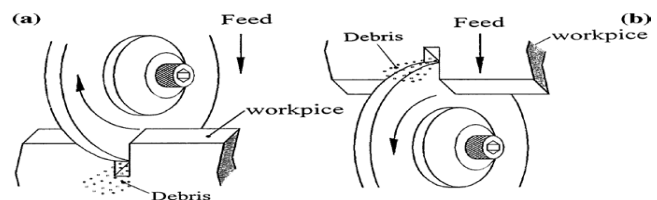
Relative position of workpiece; (a) Conventional EDG, (b) Modified EDG
